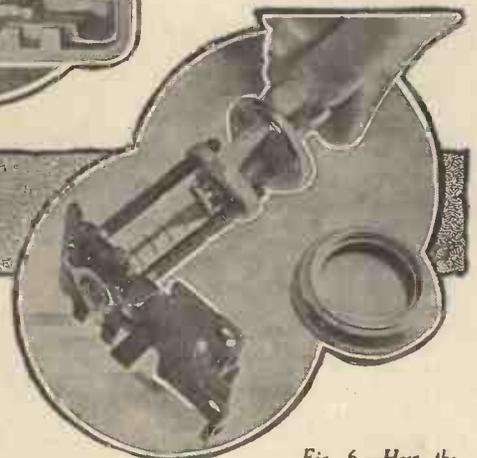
How the tumbler lock works the latch through hole in the door.
